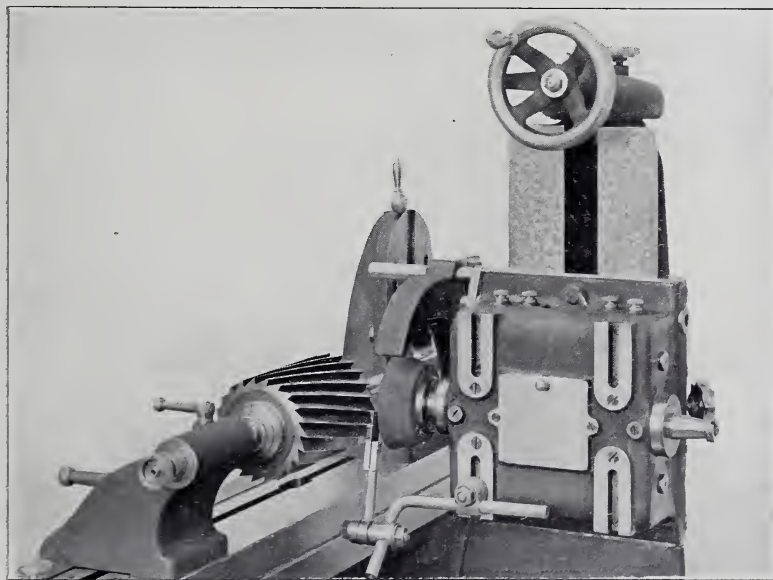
SHARPENING A SPIRAL MILLING CUTTER
